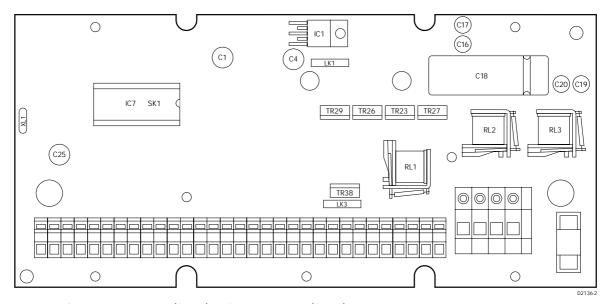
PCB Layout Type 100 (Q067) and Type 300 12V (Q068)
